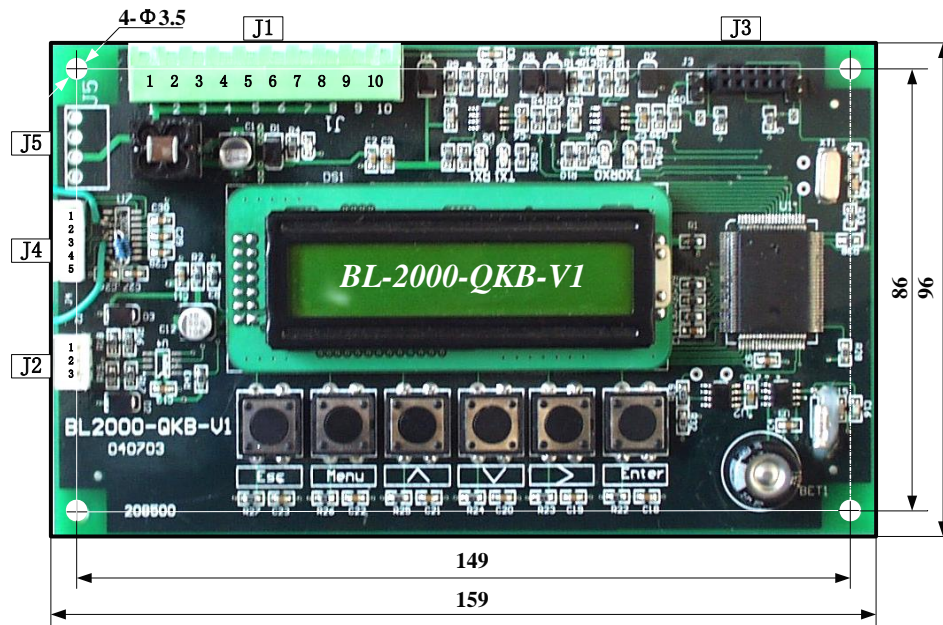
Group Control Board BL2000-QKB-V1 Shape & Dimension
